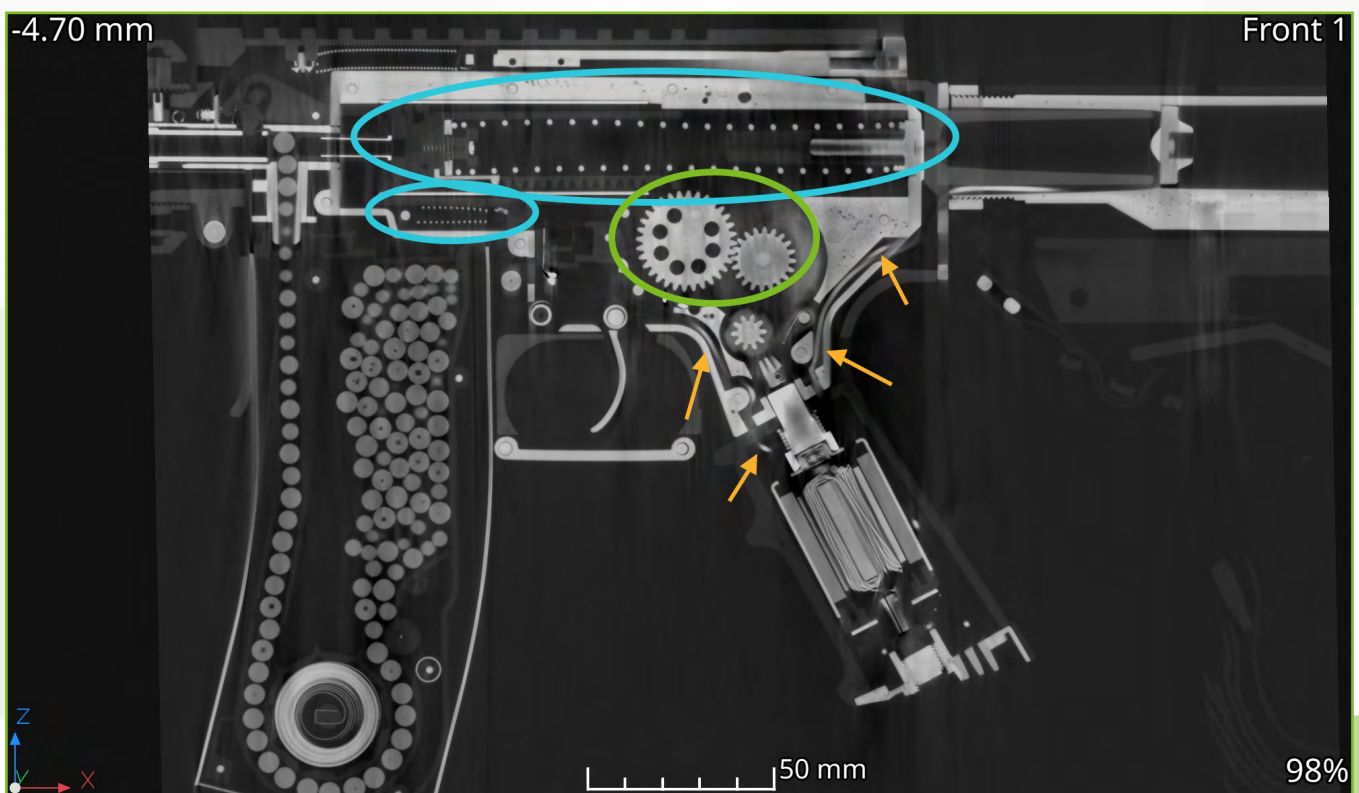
Tomographic section of the mechanical part of the weapon. Blue color shows the location of the springs, orange arrows show the wiring.
